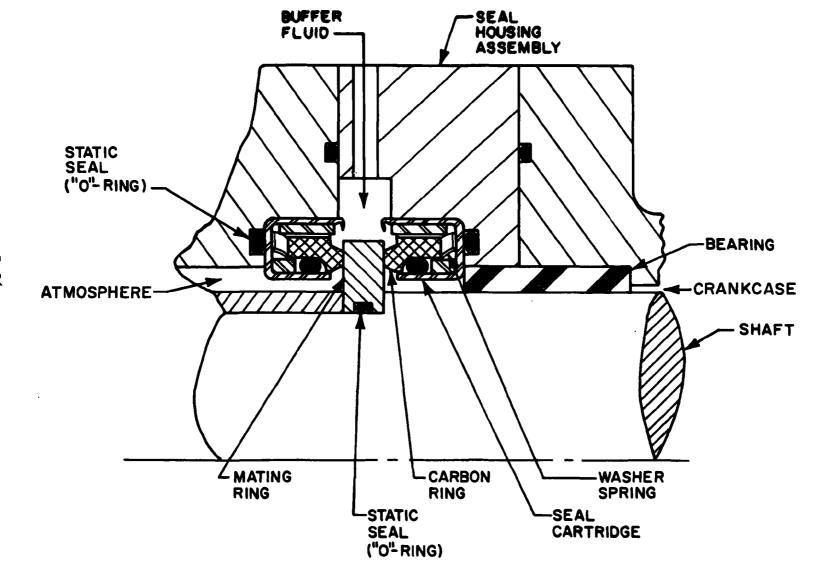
Layout Drawing of Chicago Rawhide Double-Shaft Seal.
